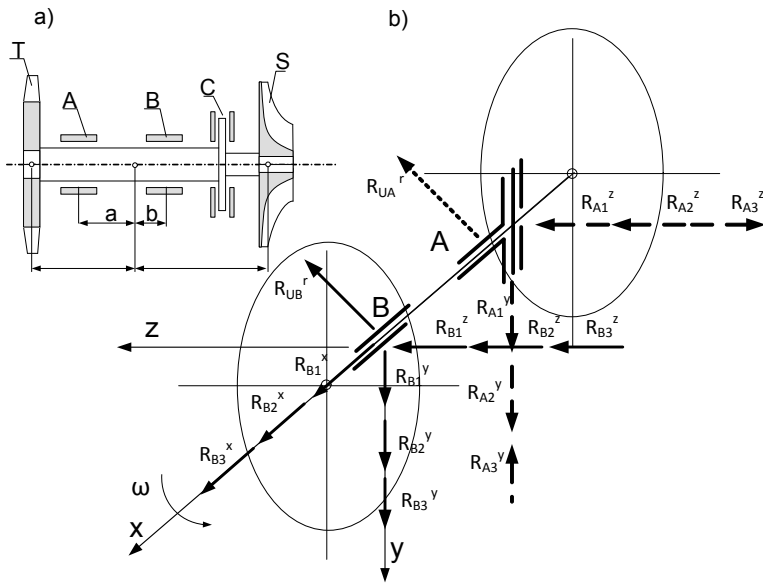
Schematic model of rotor assembly with bearing nodes, a- geometric model of assembly; b- state diagram of bearing loads of assembly, own study based on [3]
